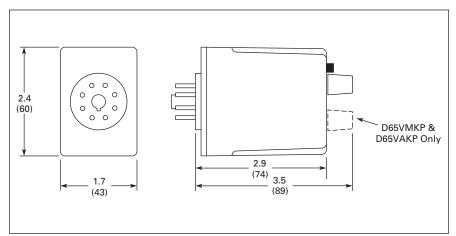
D65V Series — Approximate Dimensions in Inches (mm)
